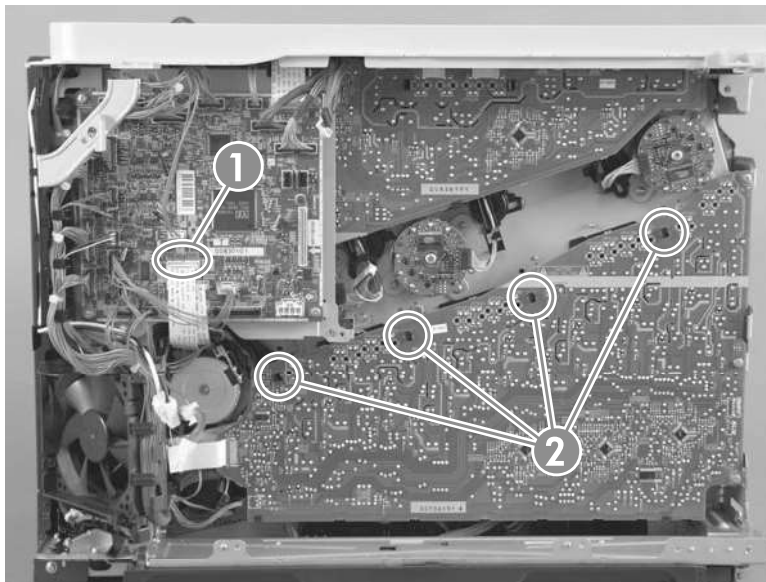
Remove the high voltage power supply lower (2 of 4)
